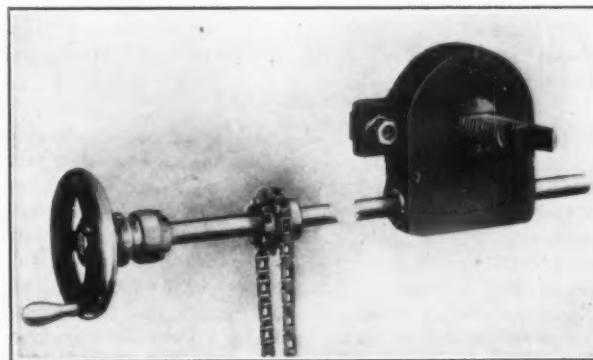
An Automatic Steady Rest for Preventing Large Gears from Springing While Being Cut.
